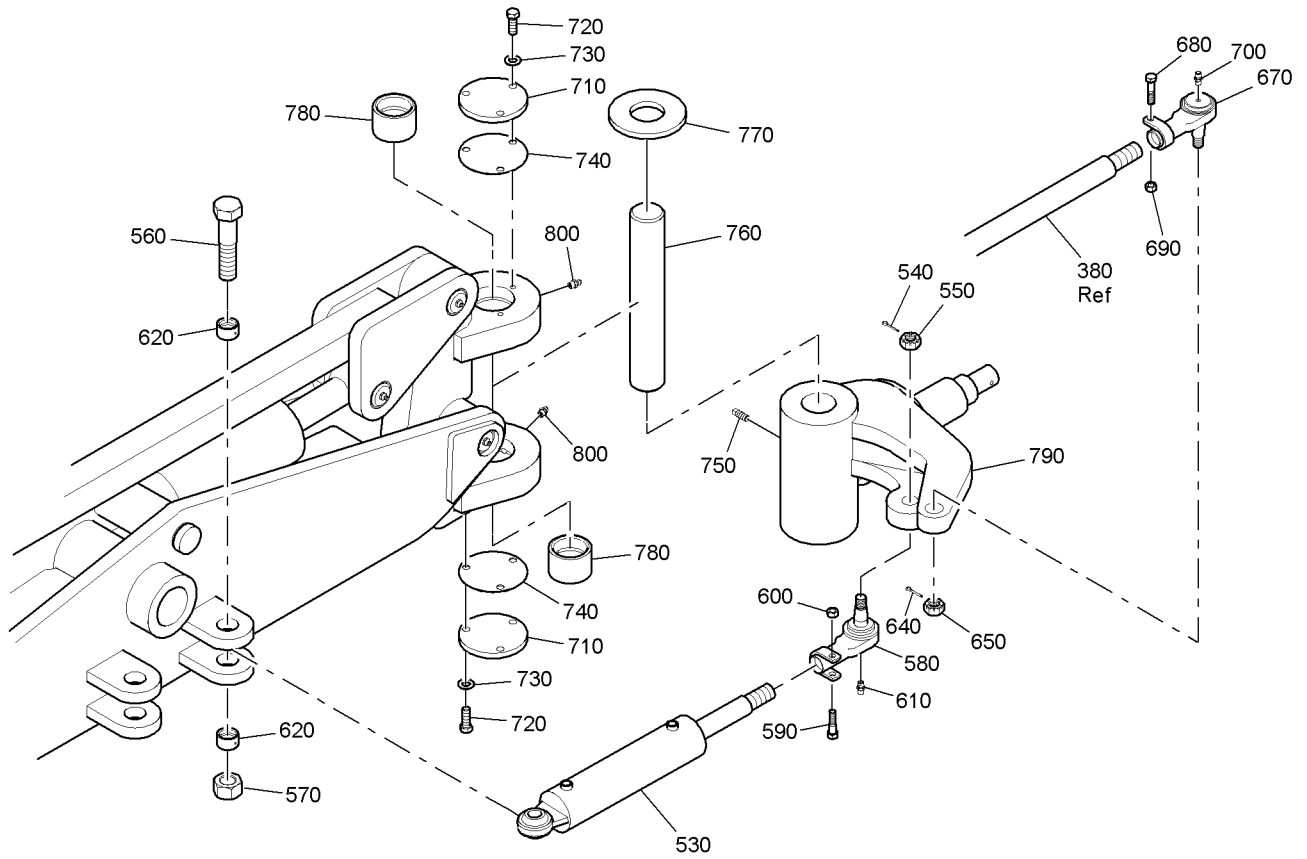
FRONT AXLE ASSEMBLY (SHEET 4 OF 6)
